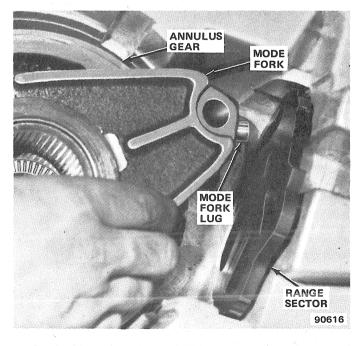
D-21 Annulus Gear and Mode Fork Removal/Installation
